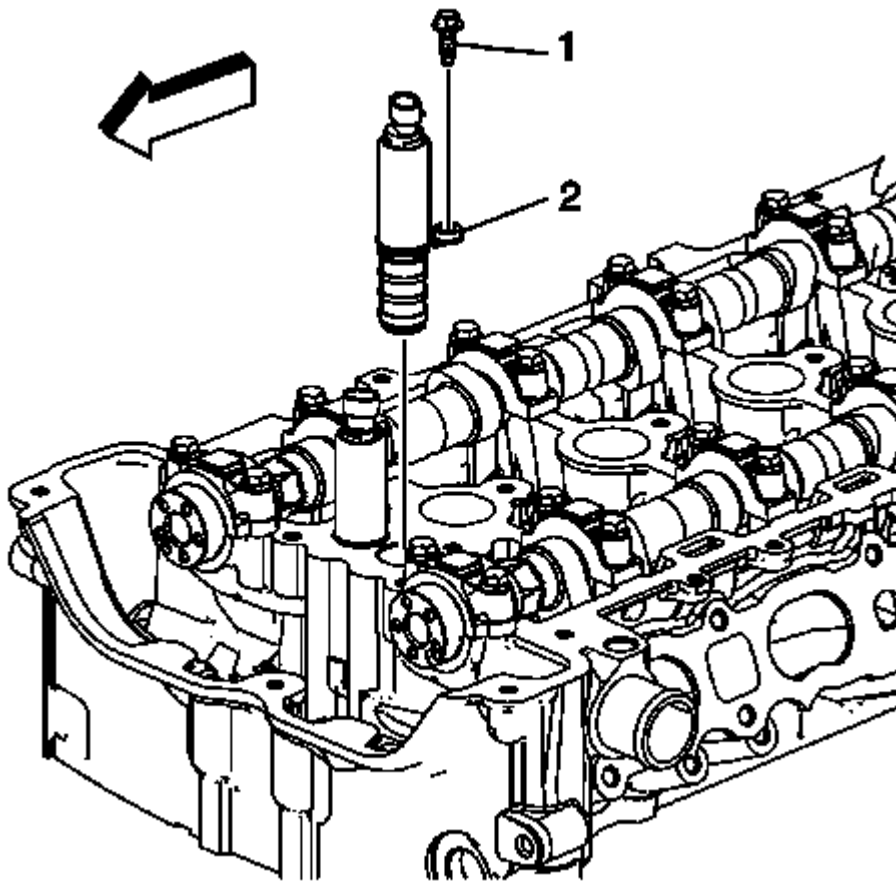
Intake Camshaft Position Actuator Solenoid Valve & Bolt
